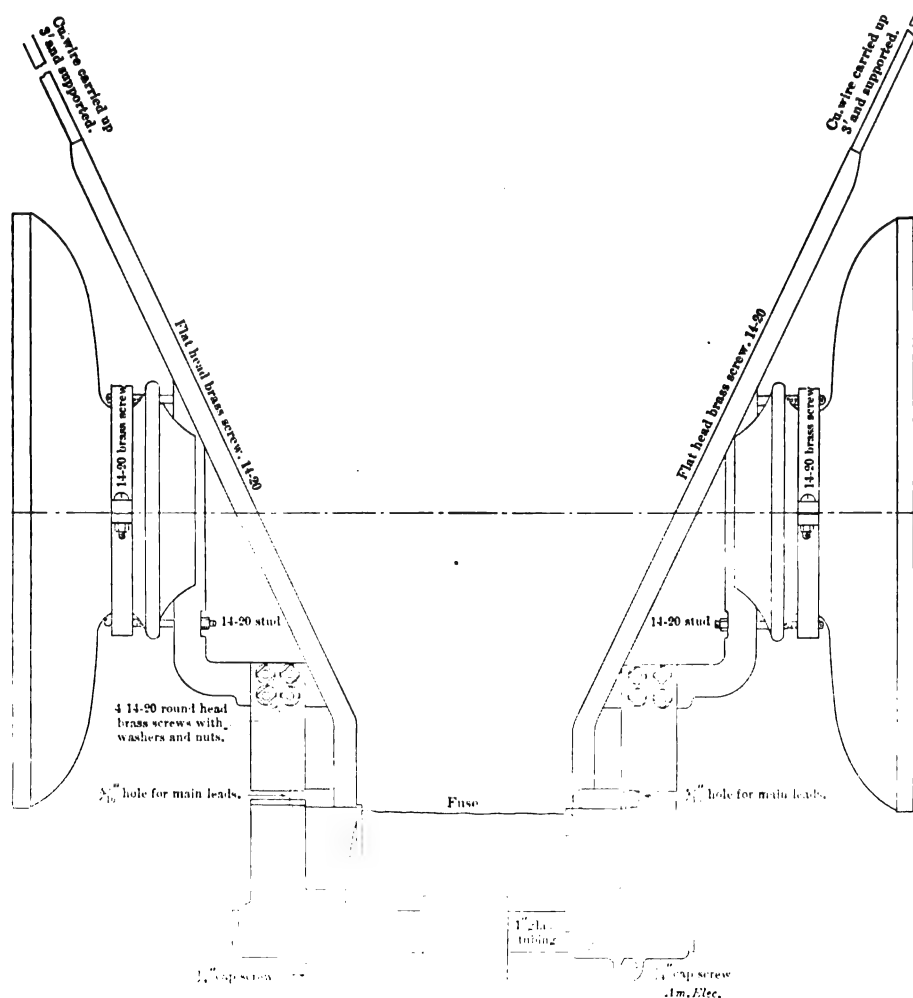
ASSEMBLY OF HIGH-TENSION SWITCH.
